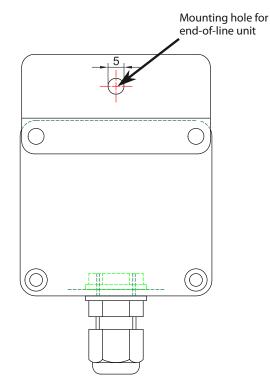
Fixing dimensions for mounting the ProReact EN Analogue End-of-line Unit
